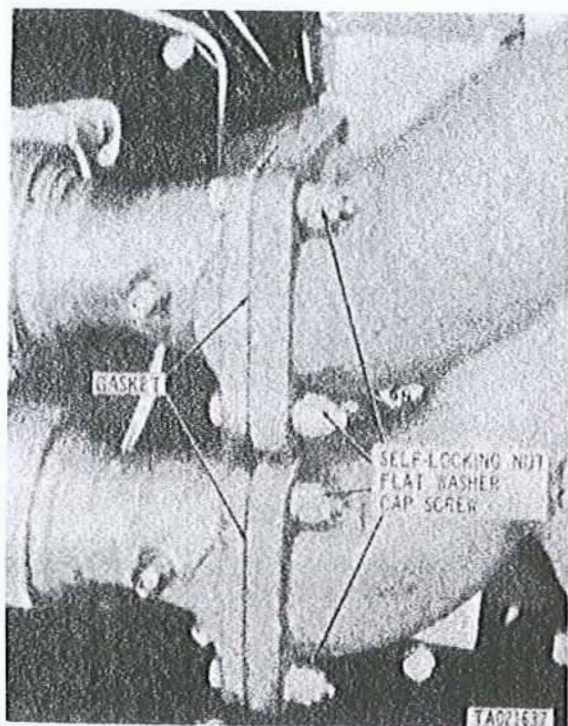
Disconnecting or connecting exhaust pipes at turbine housing.
